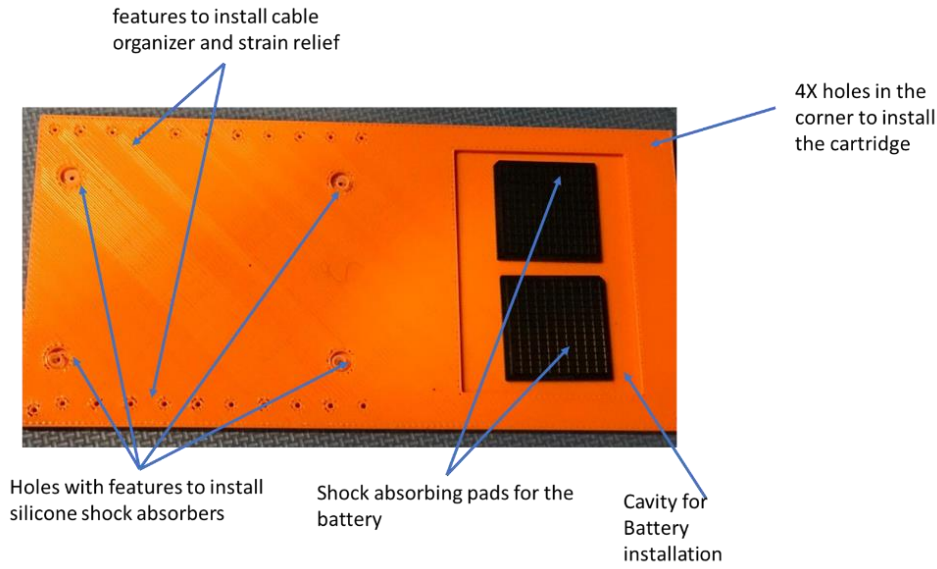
Custom designed and 3D printed cartridge base for Robot control and power module
